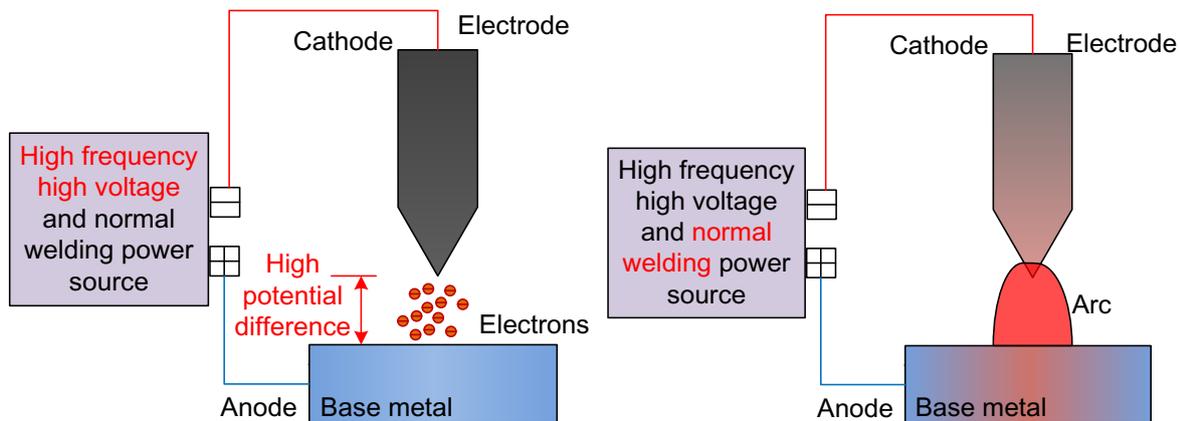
Schematic diagram showing four steps of welding arc initiation by touch start method a) impose high potential difference using HF unit across the electrode and base metal, and b) establish welding arc.
